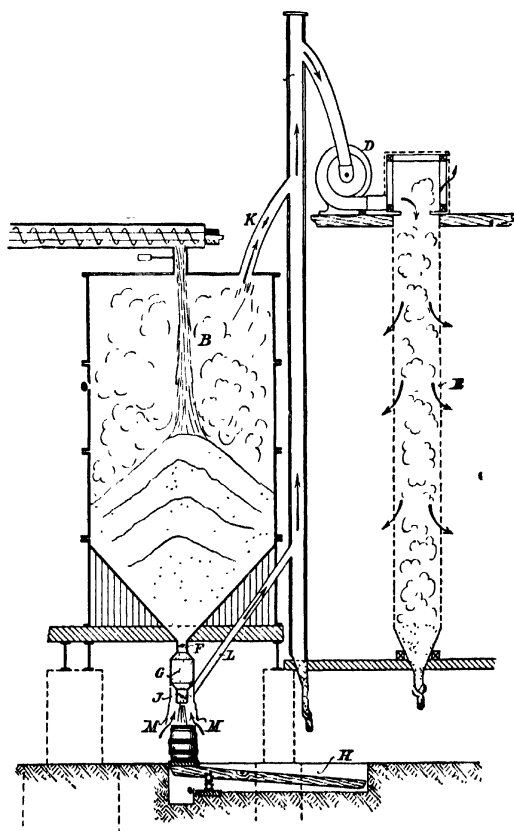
Ventilated Packing Machine (after Albrecht)
